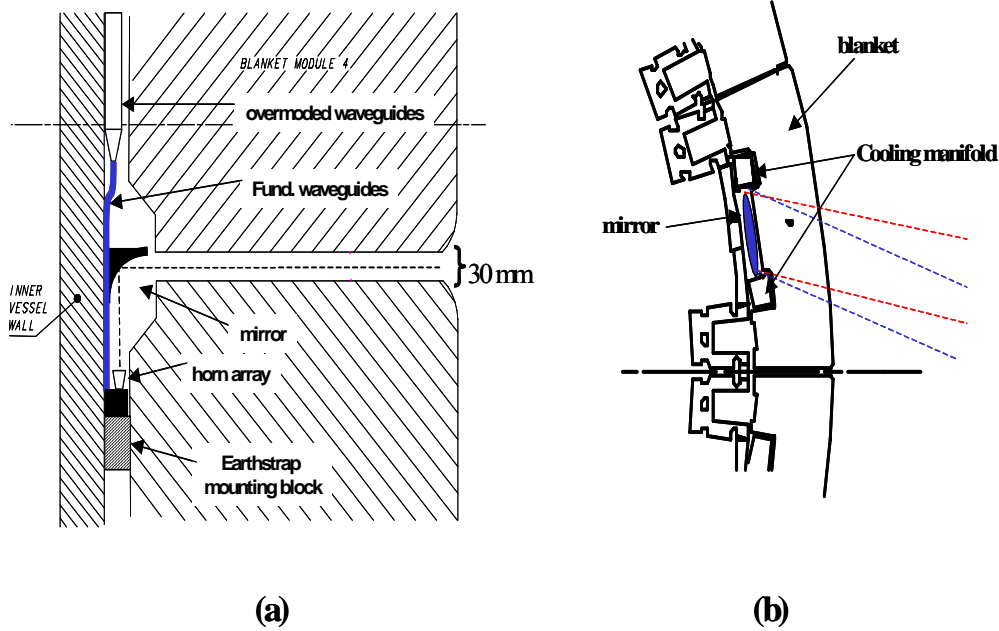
(a). Cross section of blanket modules 3 and 4 with mirror, horn array, and waveguide assembly. The vertical distance between the blanket modules gap diameter is 30 mm as shown. (b) Top view of mirror located behind the blanket module between the cooling manifolds.
